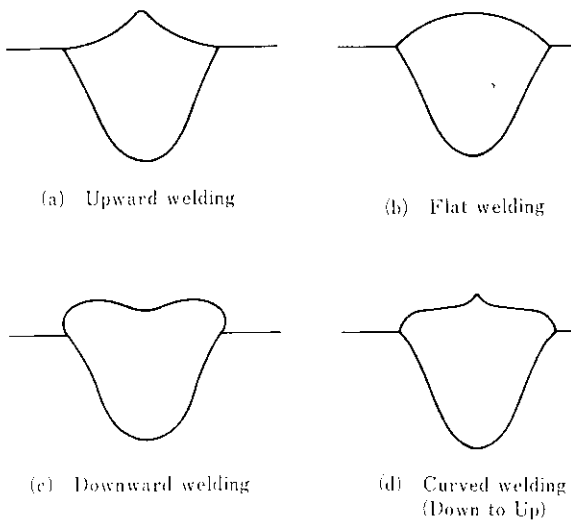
Schematic illustrations of cross sectional weld bead at various welding positions
